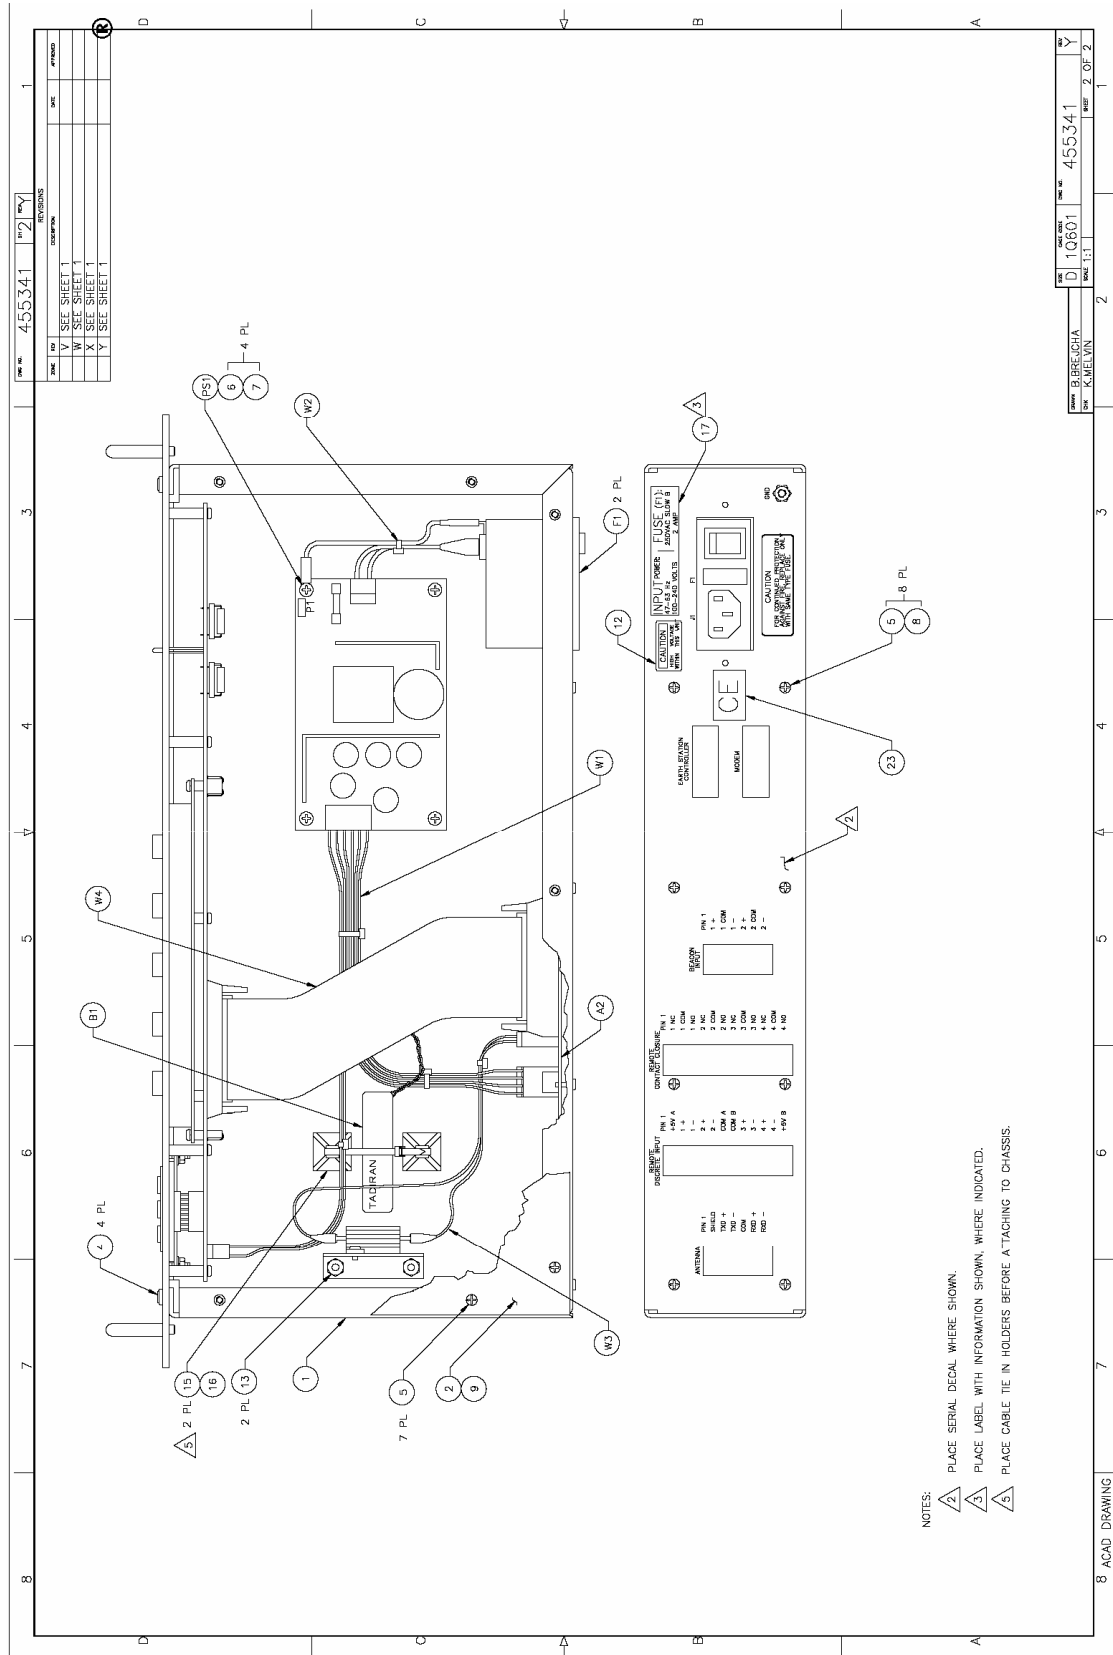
Model 8860 Assembly Diagram, AC Version (Sheet 2 of 4), 455341
